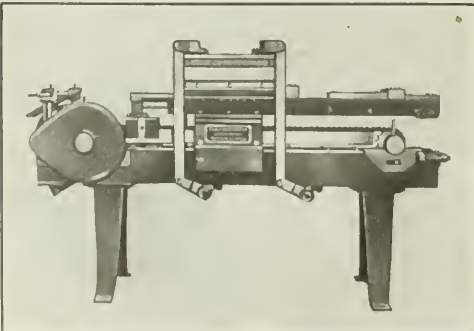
Automatic Lock-seaming Machine patented by the Stolp Co., Inc.
